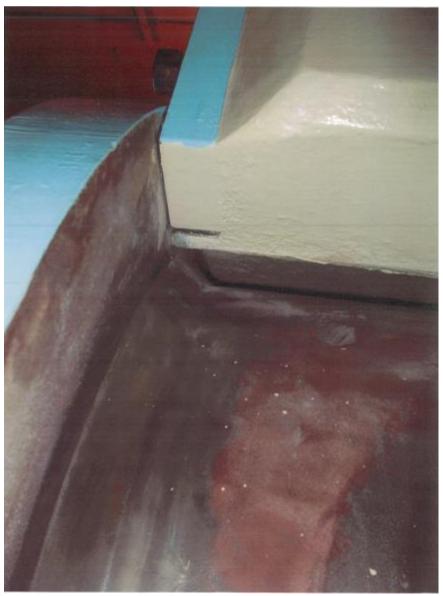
Weld 1-CP-206-CSP-W2 Limitations
